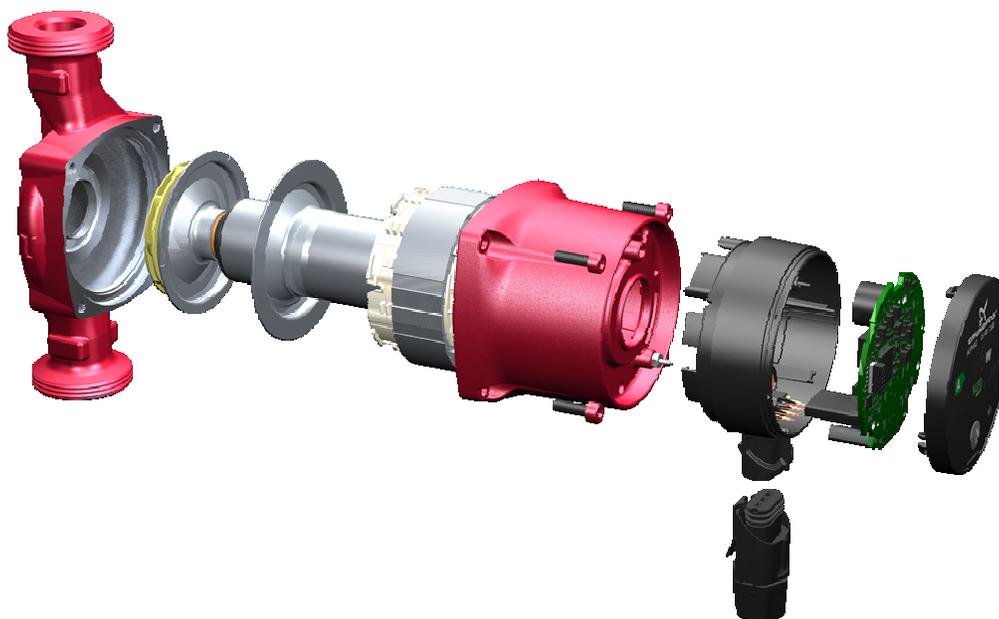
Exploded view of a Permanent Magnet circulator, showing the additional electronics and PM motor.
